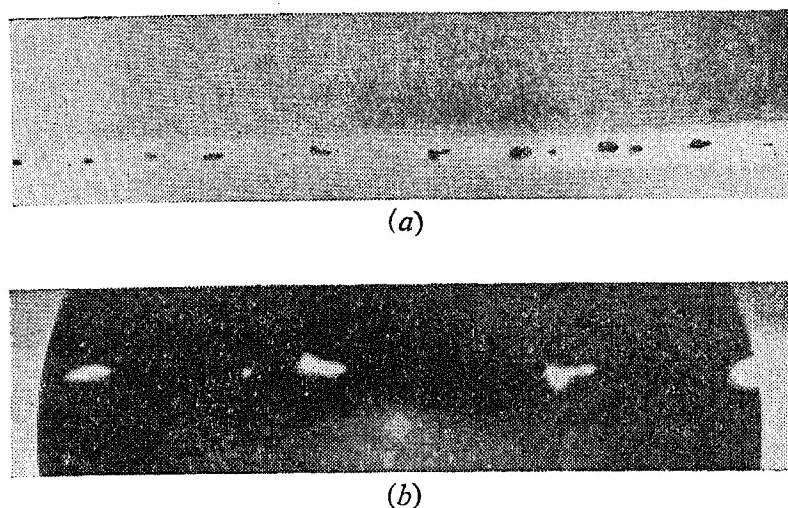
Normal and image-intensifier radiographs of a steel weld.
